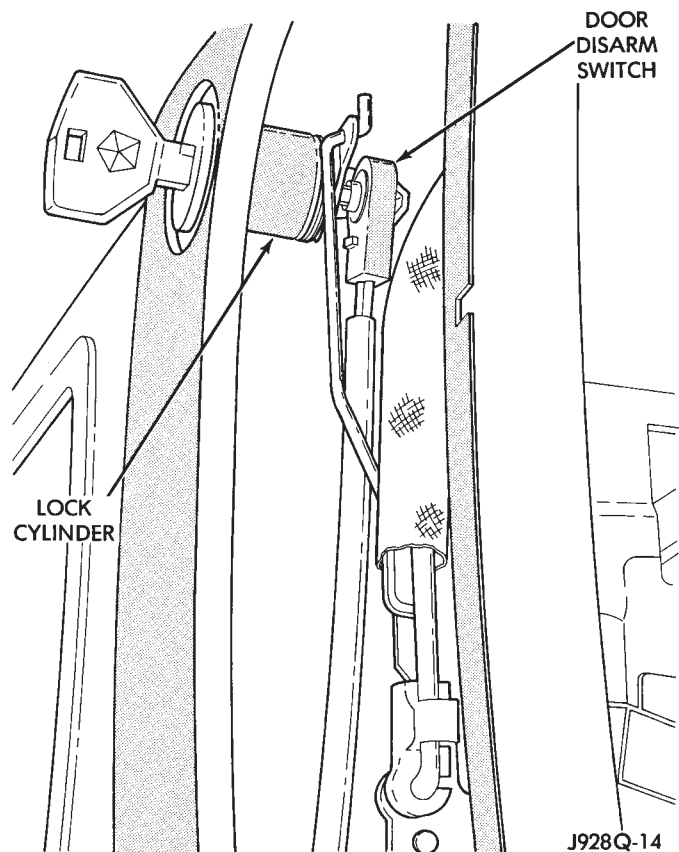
Door Lock Cylinder Switch Remove/Install - Typical
